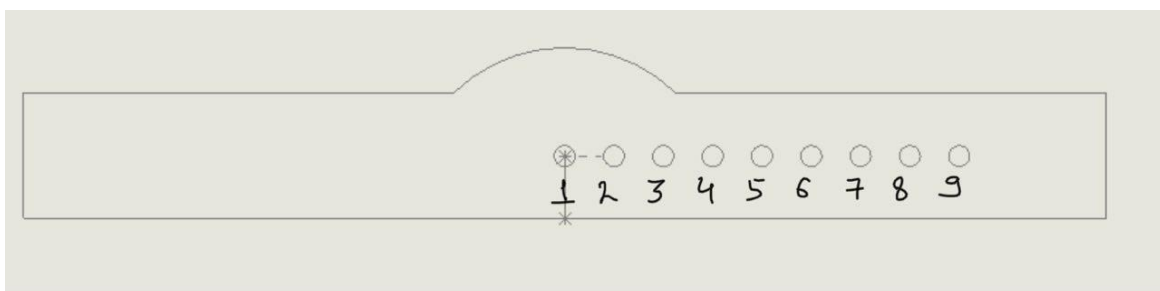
Hardness testing points from weld bed to base metal
